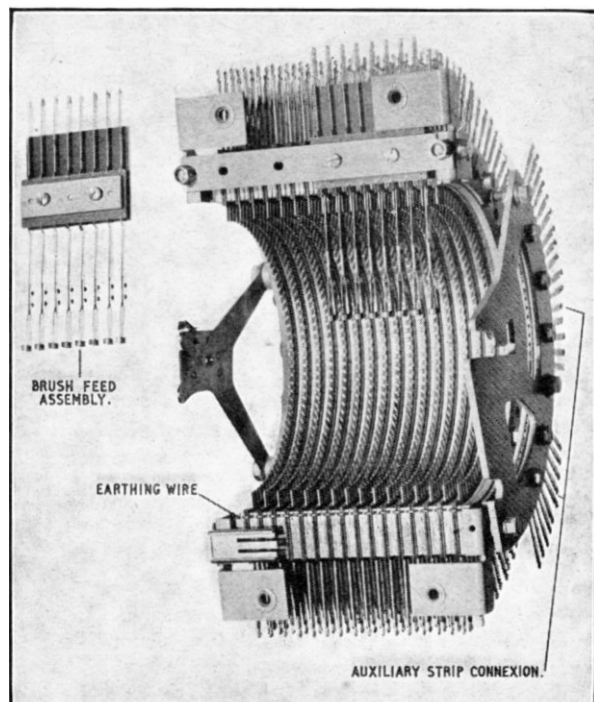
A 16-LEVEL BANK WITH ONE BRUSH FEED ASSEMBLY REMOVED.
